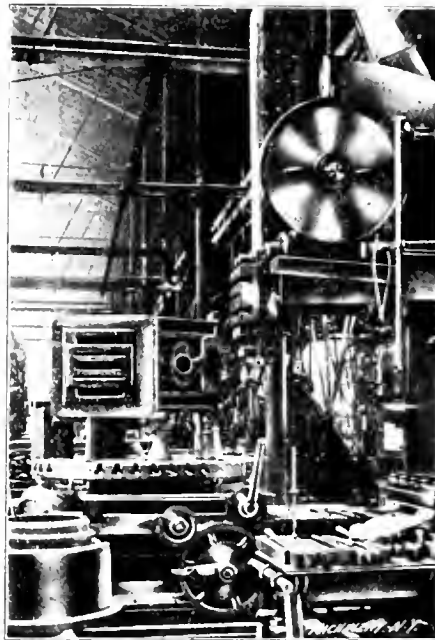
Machining a Cylinder on a Slotter—Second Position
